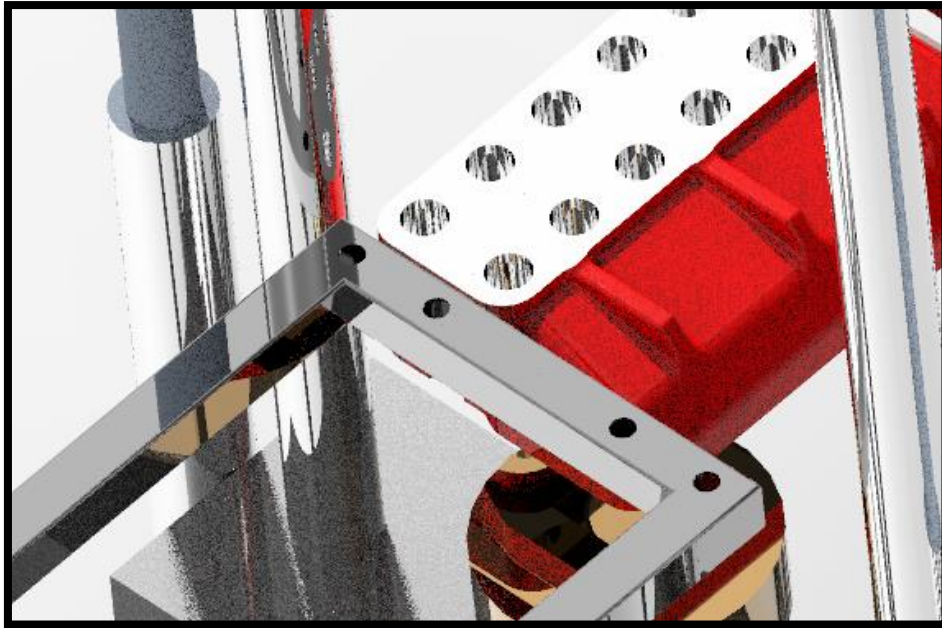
Mounting Frames Clearance Holes for Mounting Plate
